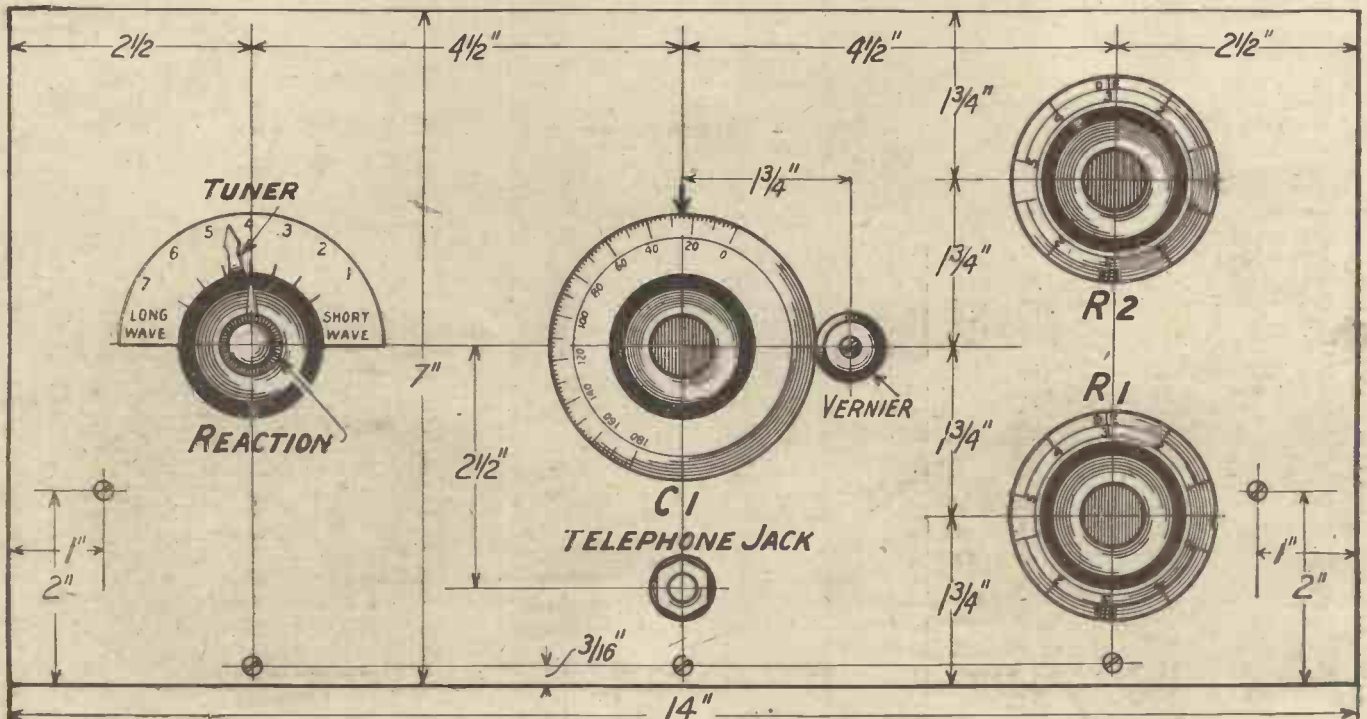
The panel may be drilled in accordance with this drawing. Blueprint C 1040A.
